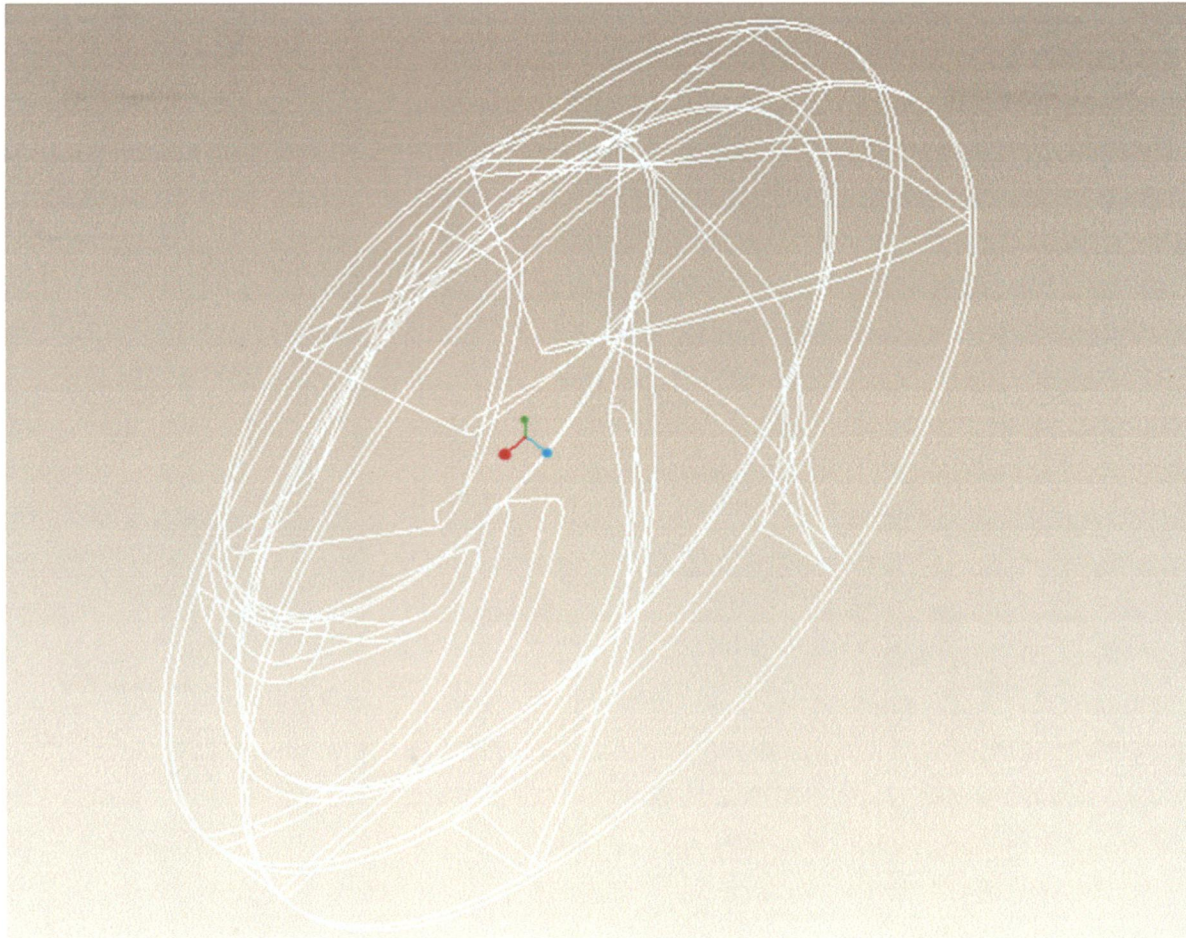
Wireframe of complete model of impeller in Pro-E
